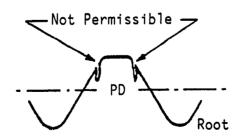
Laps Above PD Extending Toward Root, Rolled Thread
